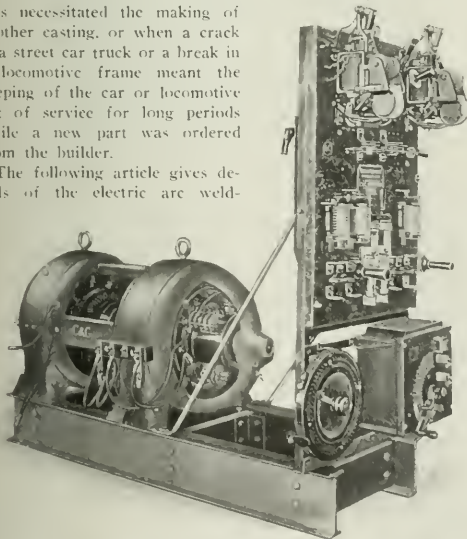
PORTABLE 300 AMPERE MULTIPLE UNIT WELDING OUTFIT
